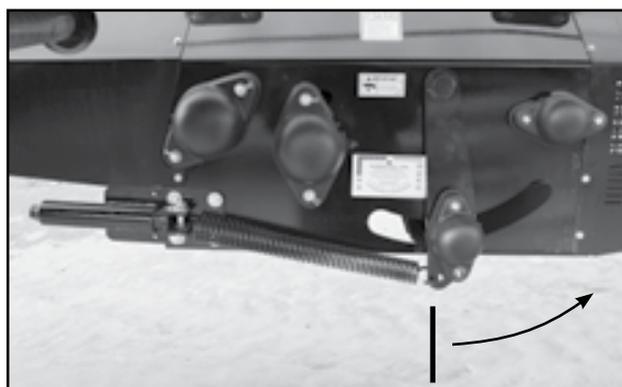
Belt Length Indicator, Positive Pinch Drive
